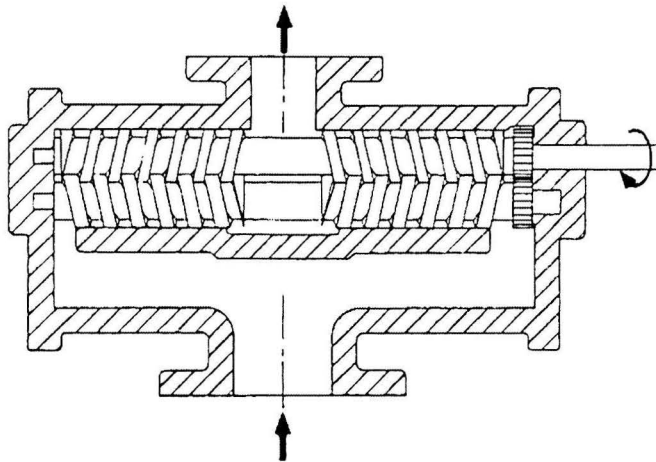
Twin screw pump with double-end arrangement and internal timing gears
